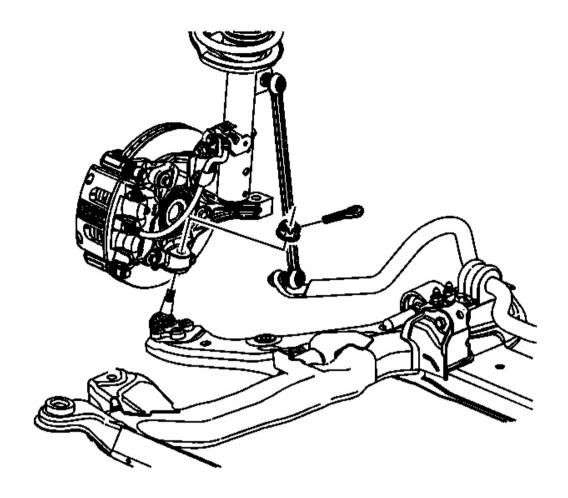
Lower Control Arm Ball Stud, Cotter Pin & Nut Courtesy of GENERAL MOTORS CORP.
